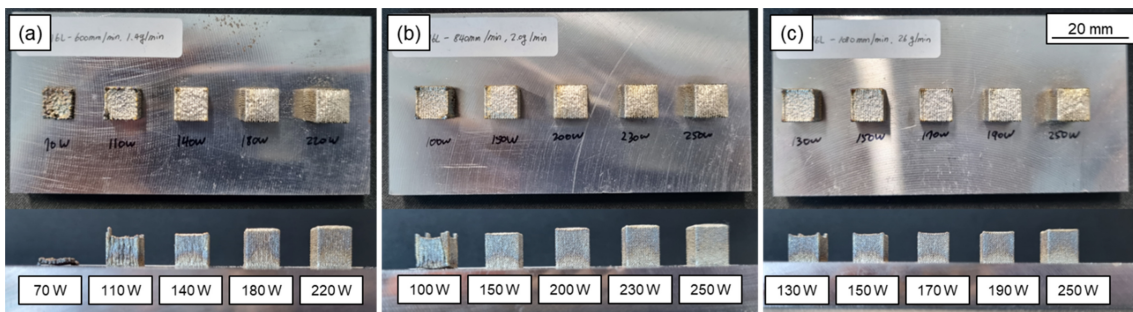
Top view and side view of manufactured cube specimens with substrate; (a) 600 mm/min (b) 840 mm/min (c) 1,080 mm/min
